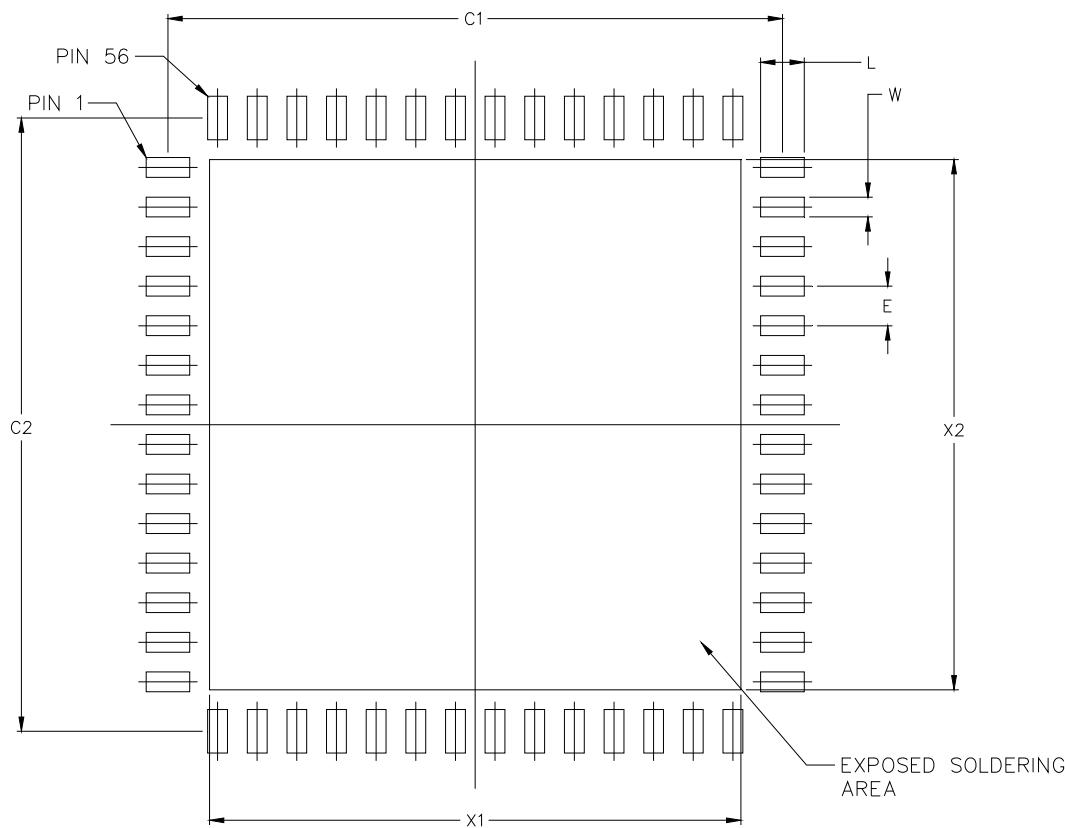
56-QFN 8x8 mm PCB Layout Footprint
